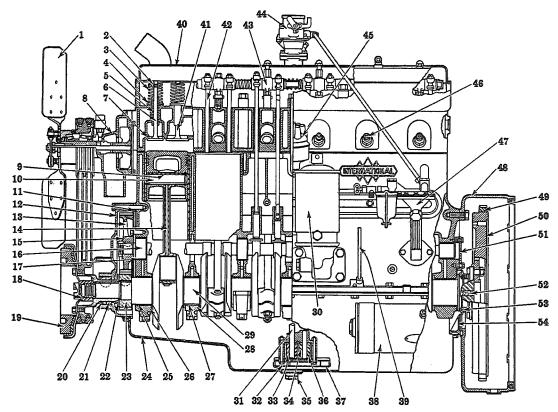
, FBB-361, FBB-401, FBB-450A Engine
